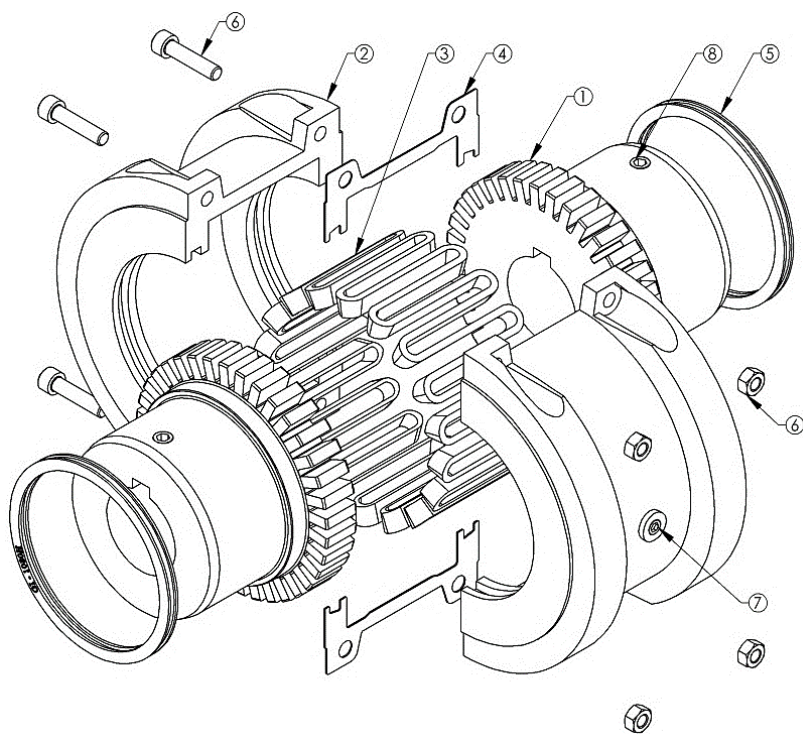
HORIZONTAL (T10) TAPER GRID COUPLING (EXPLODED VIEW)
